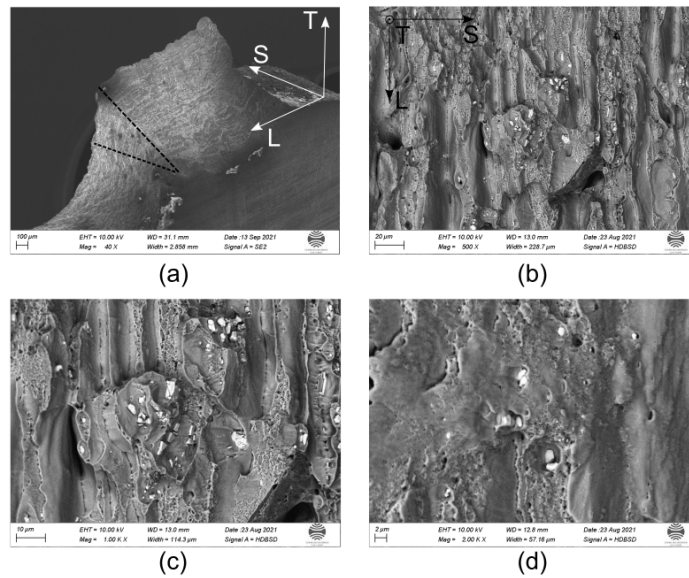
Fractography via scanning electron microscopy (SEM) of 2198T8R under ‘shear to tension’ (ST): (a) Macroscopic slant fracture path in the T-S plane and relative smooth fracture surface, microscopic features like (b) large dimple that initiated to the (c) intermetallic particles and grain-shaped steps with medium dimples that initiated on the grain boundaries and (d) sub-micro dimples with the broken intermetallic particles.
